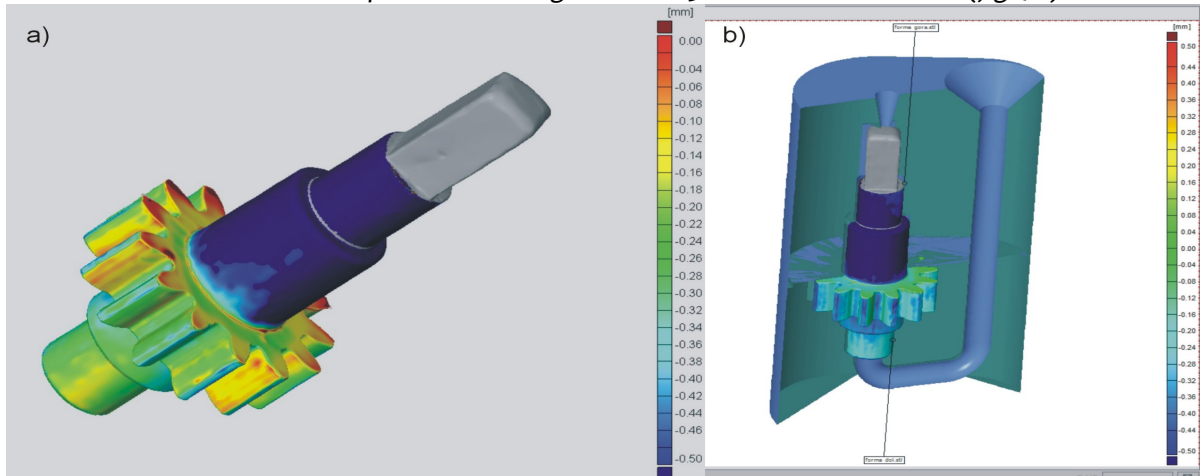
Wheel cast surface image was compared with the casting mould 3D-CAD model (a) and 3D-CAD nominal model (b)
